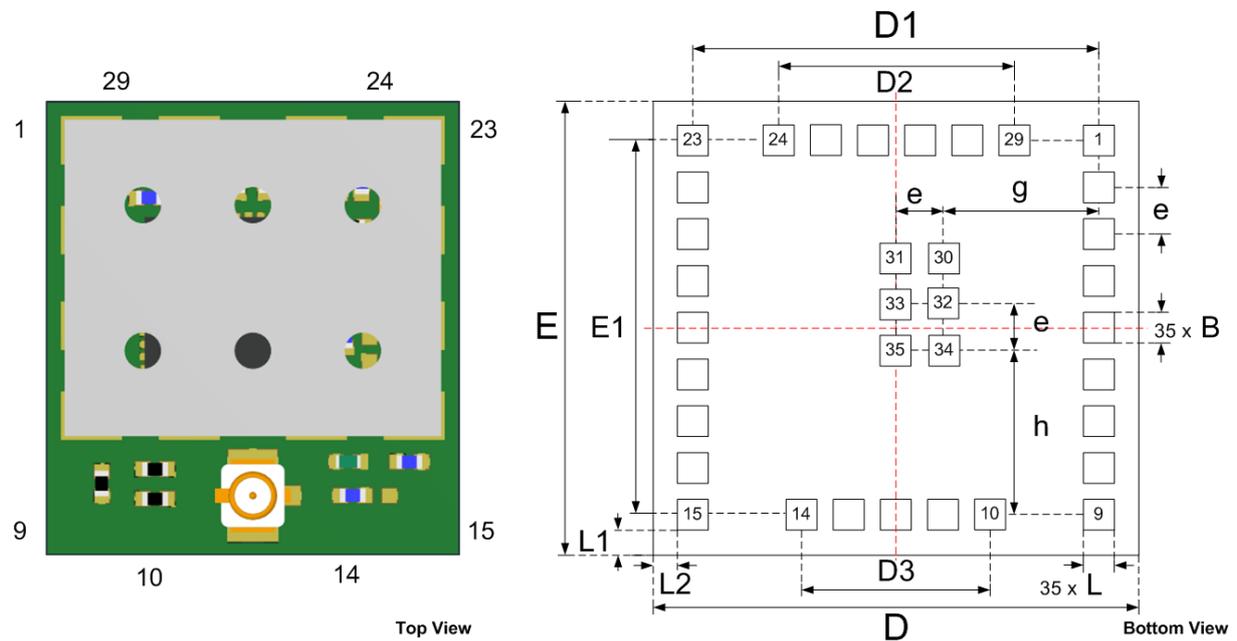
iM891A-XL package drawing in top (left) and bottom view (right)
